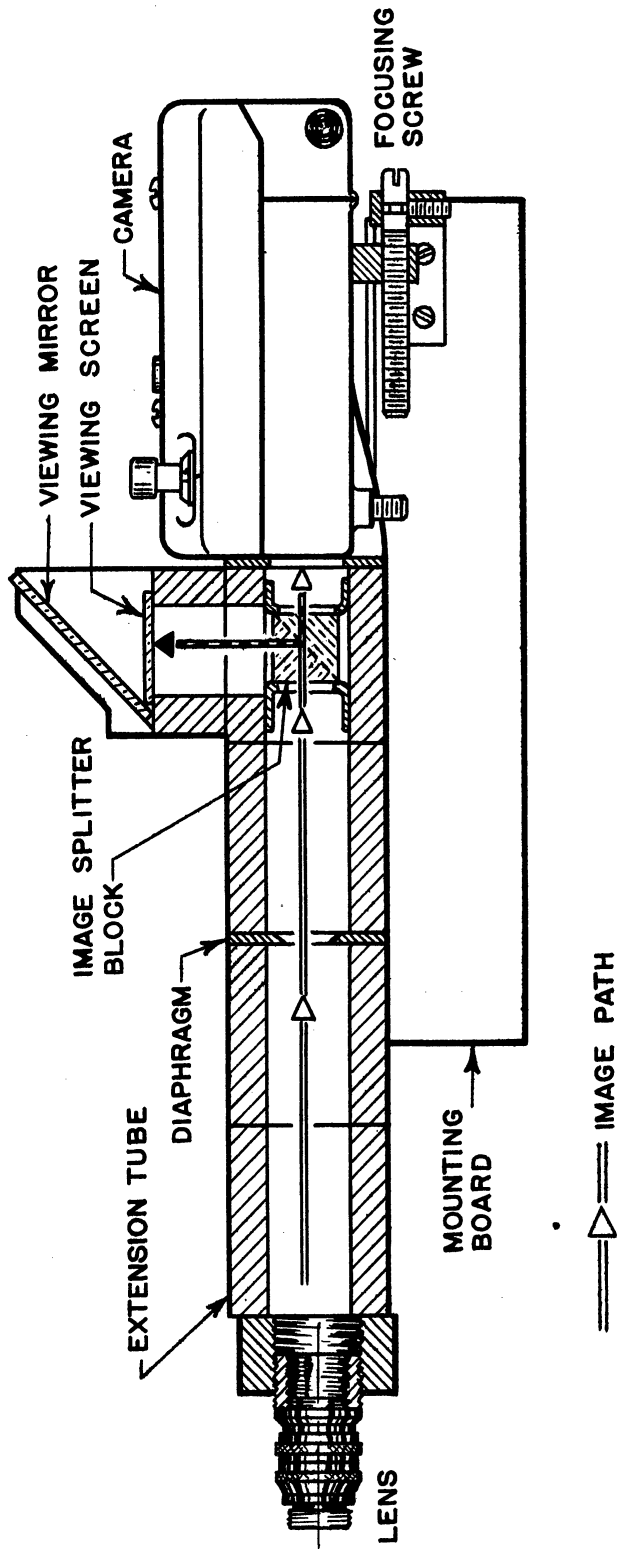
SECTIONAL VIEW OF LENS EXTENSION TUBE - SHOWN MOUNTED TO CAMERA
